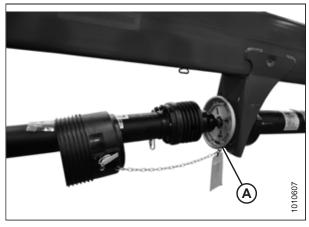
Driveline Shield Cone Removed from Metal Plate
